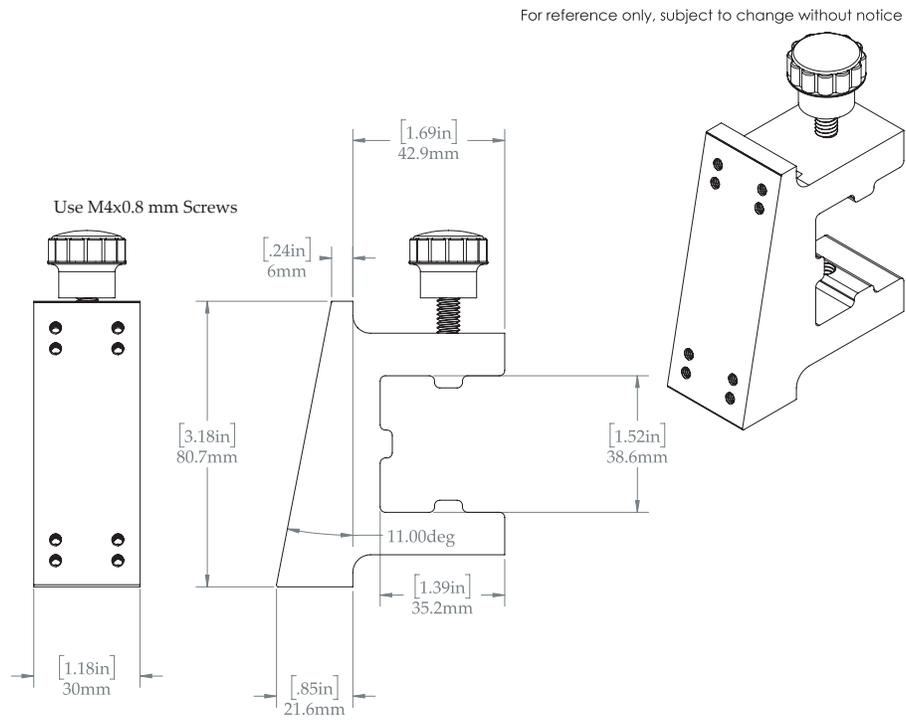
Angled 1.5" Sensor Mounting Bracket for use with 1.5" extrusion
